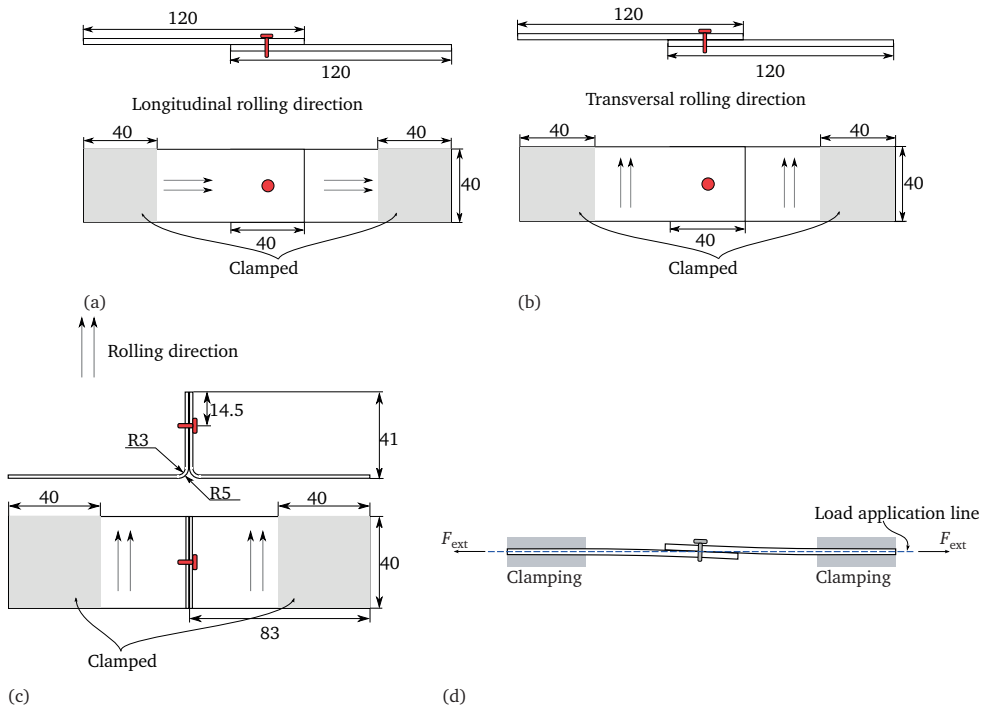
Single lap-joint and peeling test set-up. (a) Longitudinal material orientation. (b) Transversal material orientation. (c) Peeling specimen. (d) Clamping deformation in single lap-joint test.
